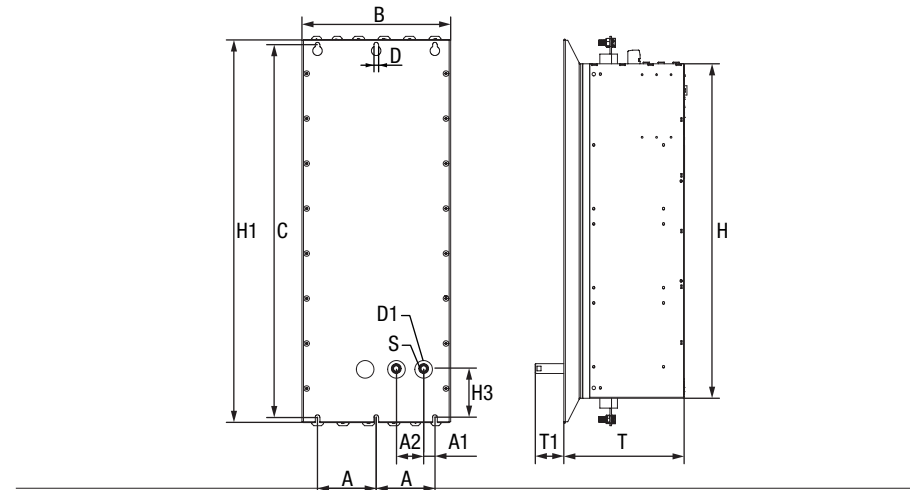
Dimensional drawing, liquid cooling housing variant, based on Size 7 as an example
